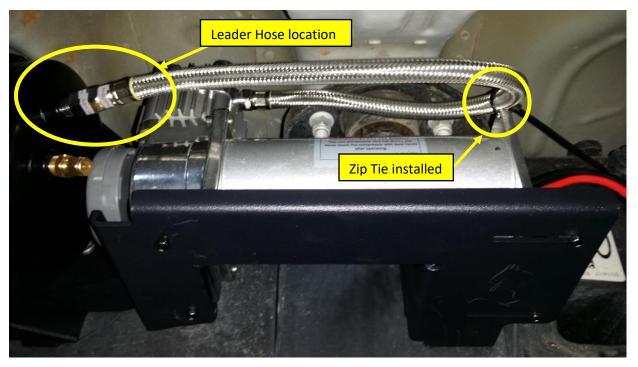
Compressor installed. Leader Hose Zip-tied to Compressor end plate hole
